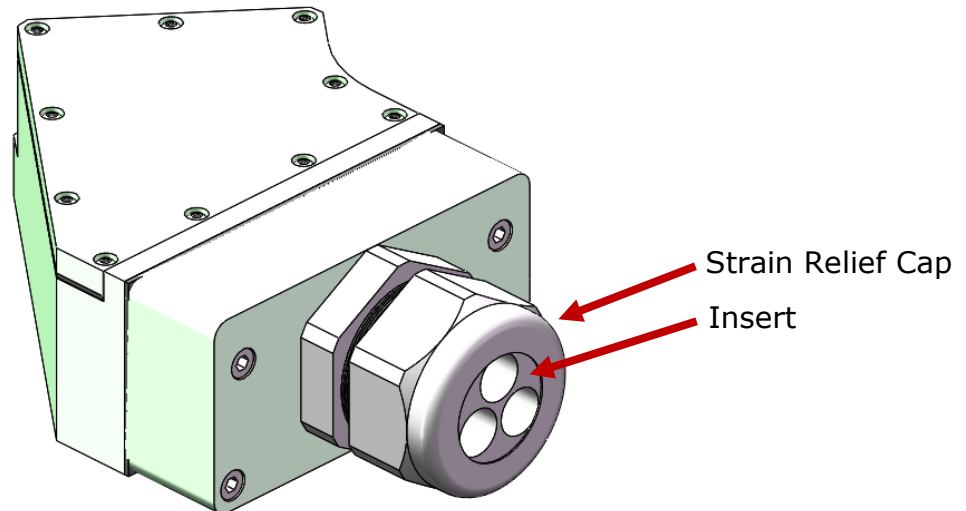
Remove/Install Strain Relief Cap and Insert
